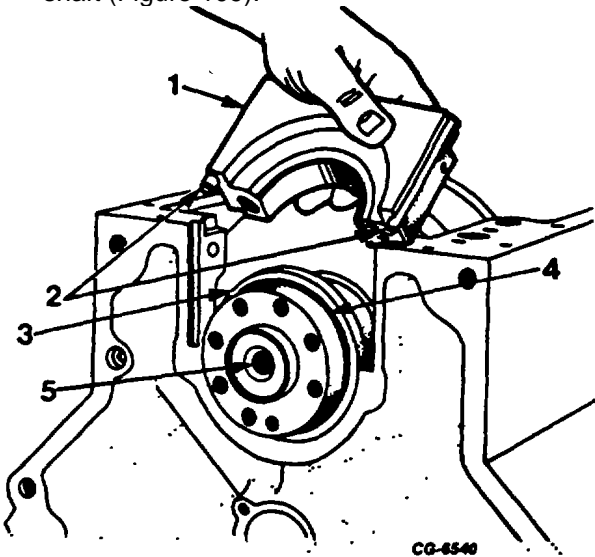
Removing Rear Main Bearing Cap and Oil Seals
